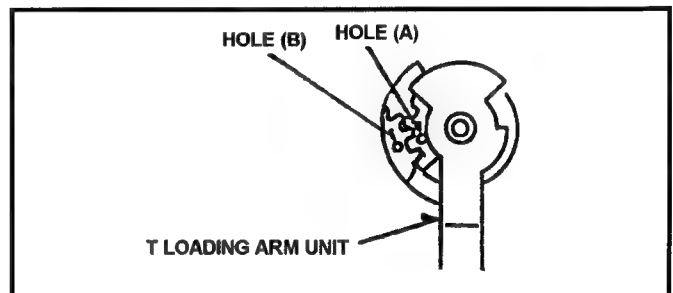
Phase Adjustment of T1 Loading Arm Unit
